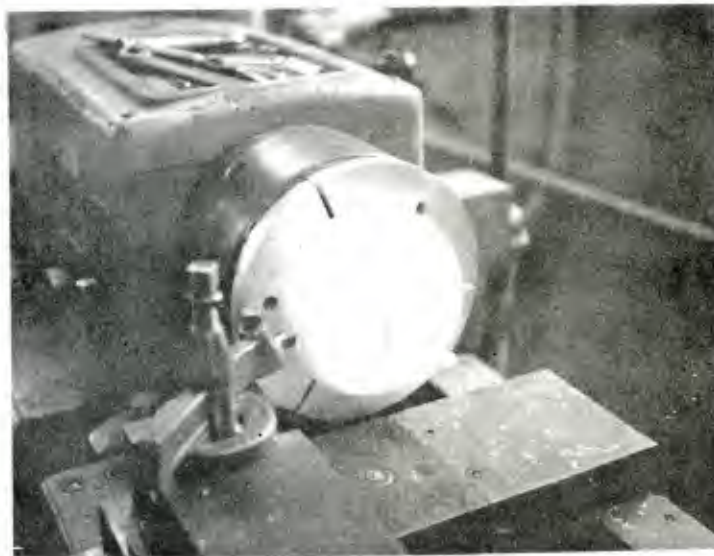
Removal of diaphragm gate and sprue machine to length and chamfer ID
